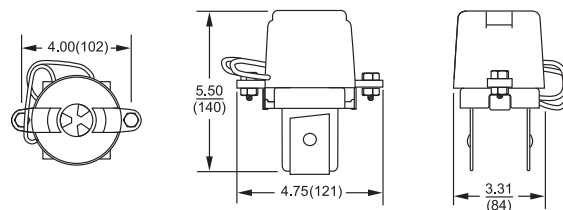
Figure B — Indicator with Attached Sensor. Tie-Wrap Mounting.
